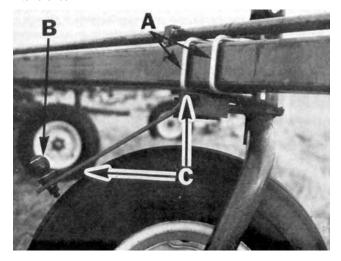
Packer Castor Wheel Twisting: (A) U-bolts, (B) Packer Hitch, (C) Interference.
